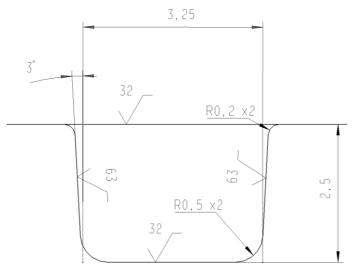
Measurements and surface tolerances of the O-ring groove.
